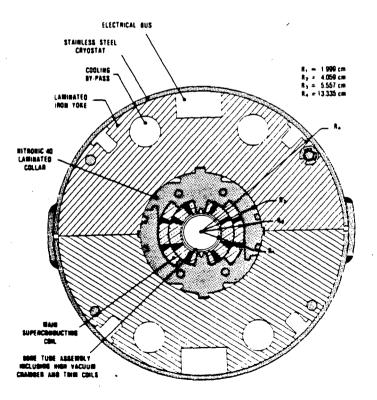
Cross section of collared coil assembly surrounded by a circular split yoke of laminated steel.
